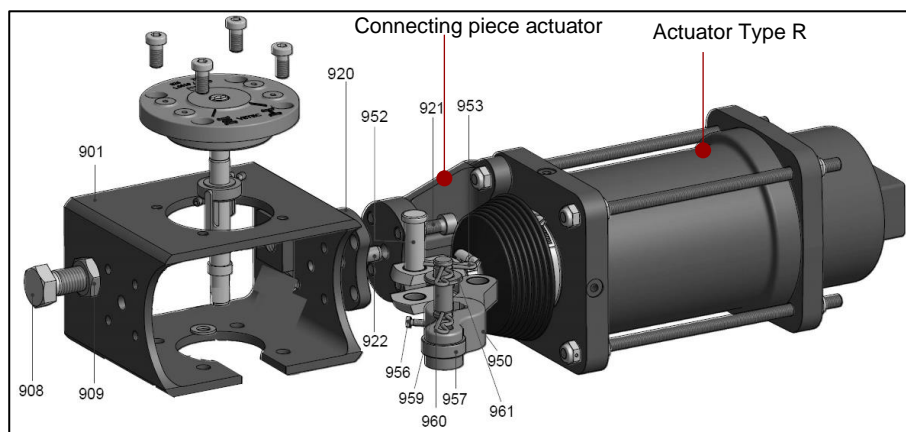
Assembly drawing: R-actuator mounting kit without manual override
